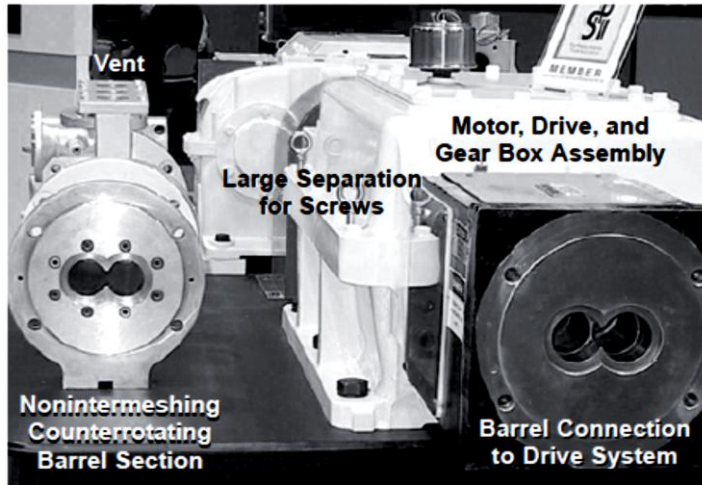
Welding Engineers counterrotating nonintermeshing twin screw barrel and drive train.
